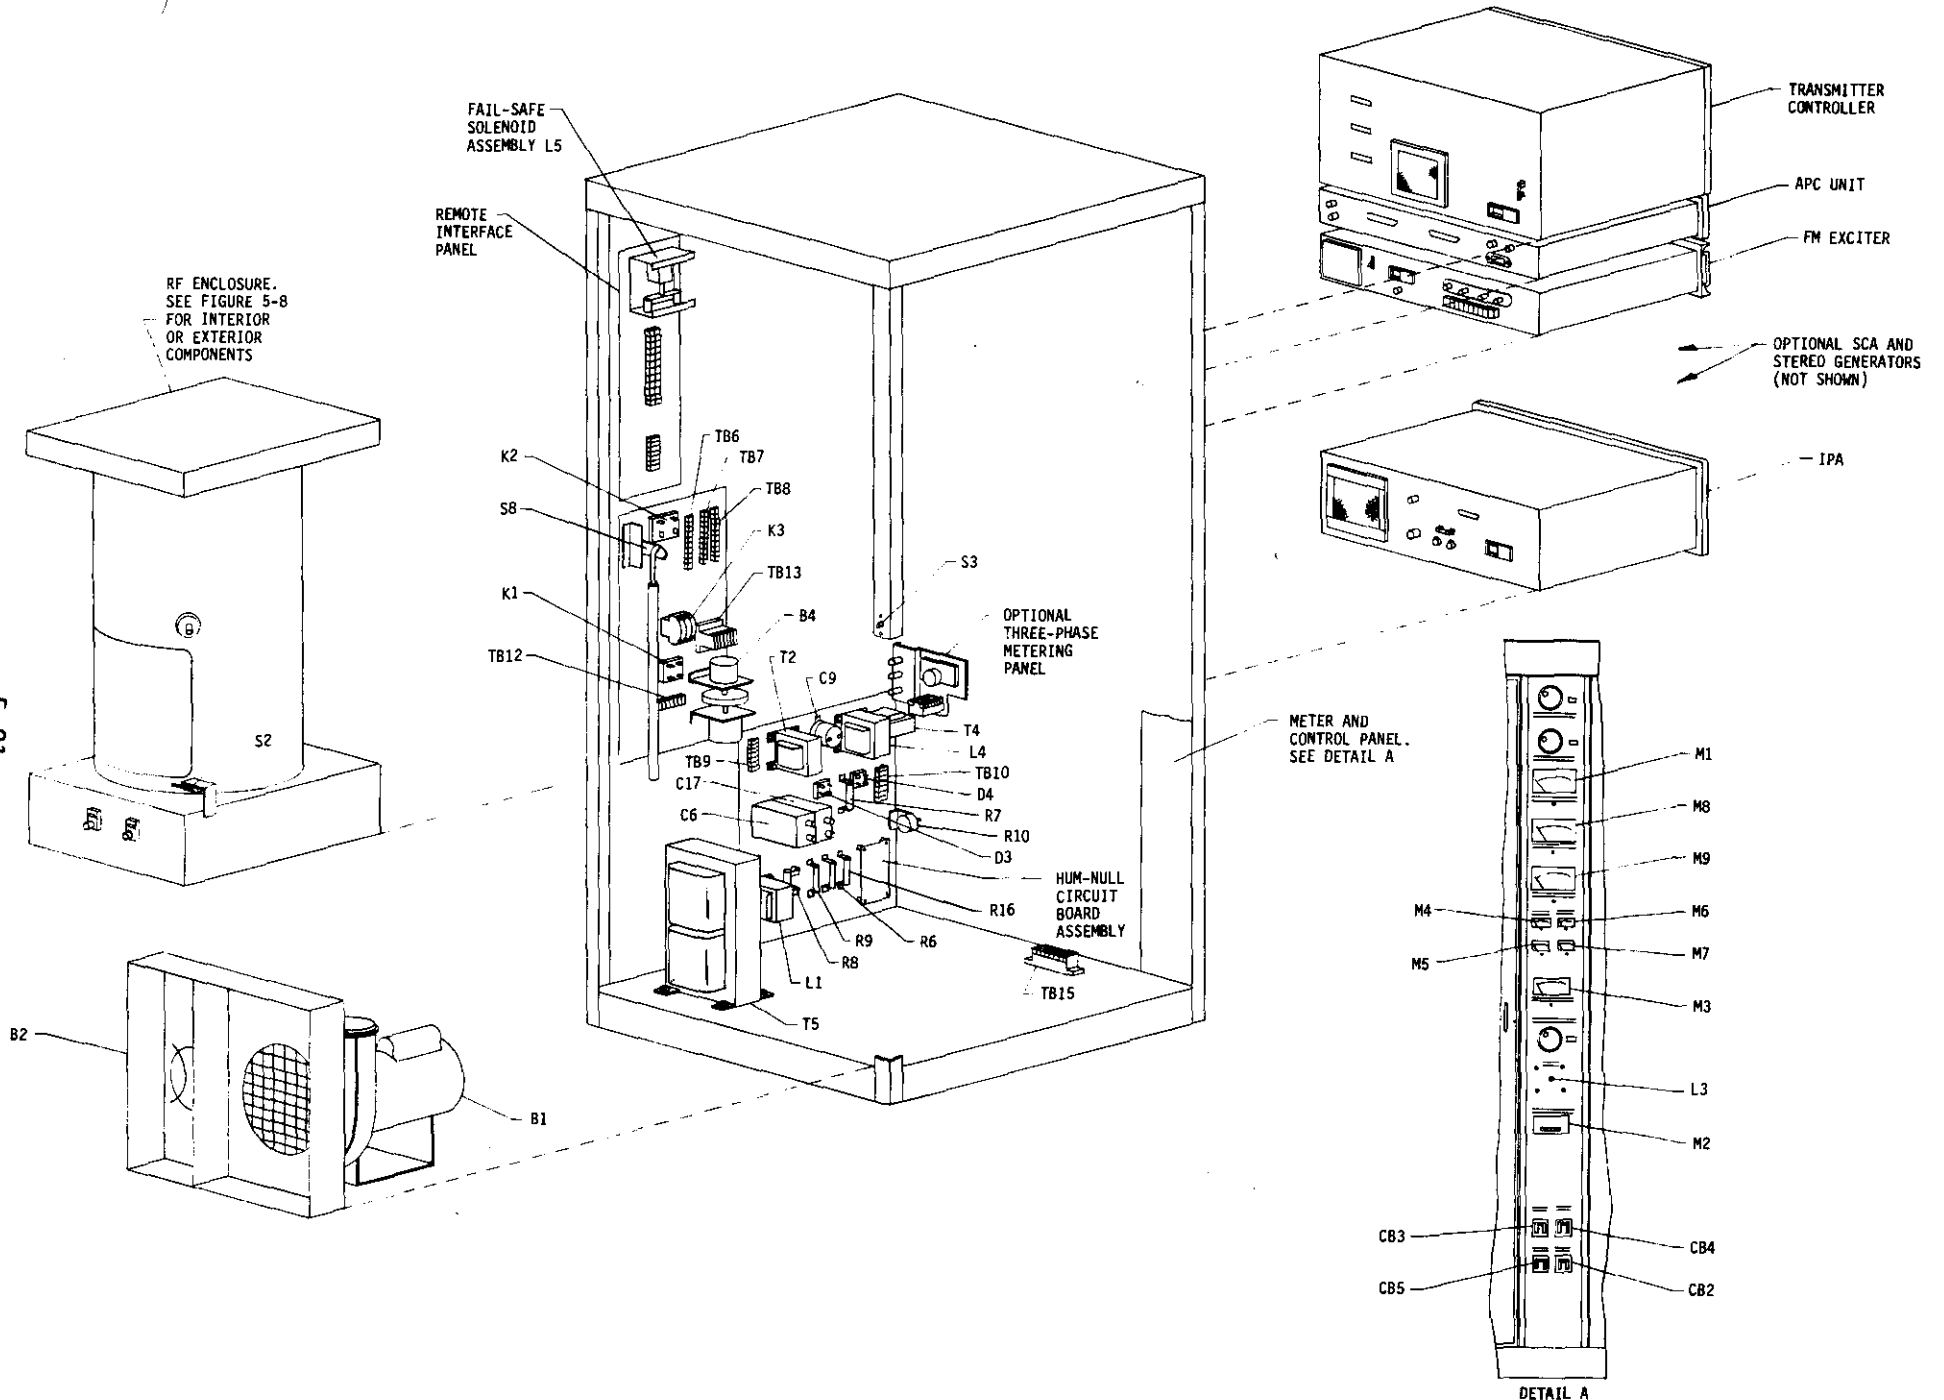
FM-10A PA/DRIVER CABINET COMPONENT LOCATOR
